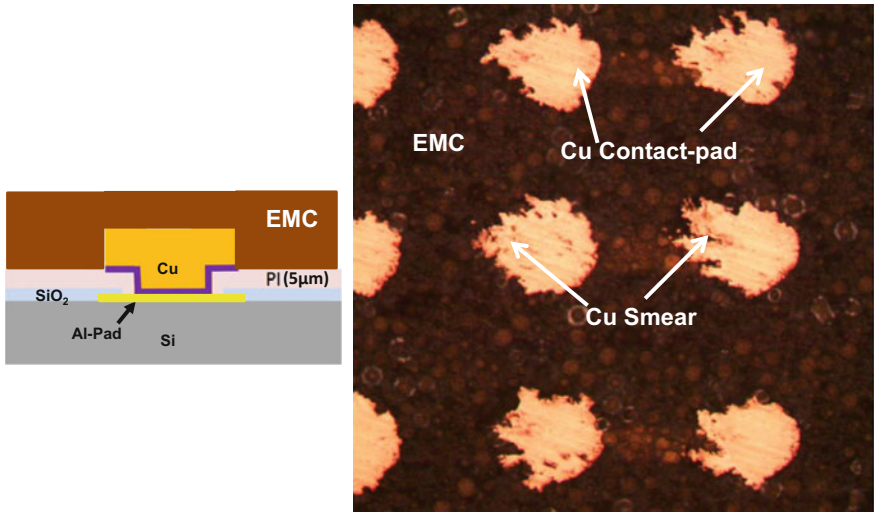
Cu smear during backgrinding of the EMC to expose the Cu contact pad
